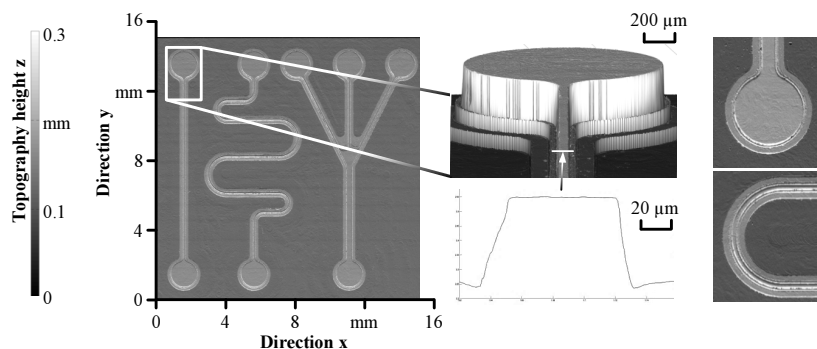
Topography and details of machined part using confocal laser scanning microscope
